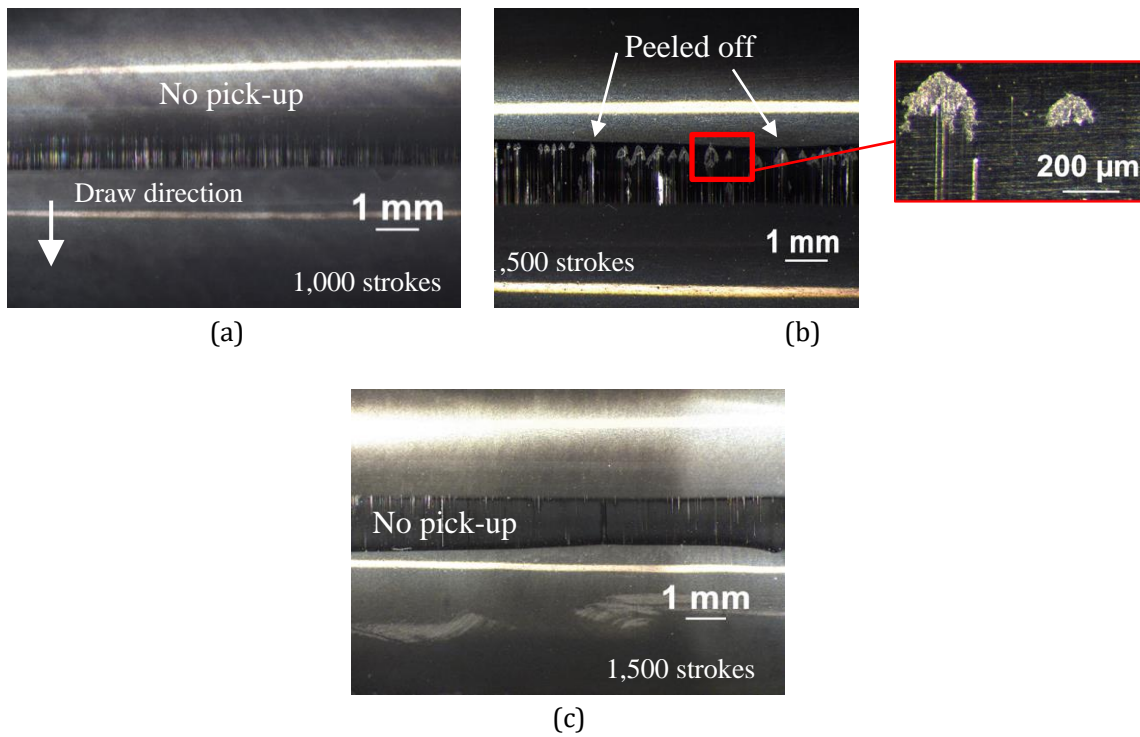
Tool surface appearance after (a) 1,000 strokes in dry condition, and 1,500 strokes for (b) dry and (c) lubricated conditions.
